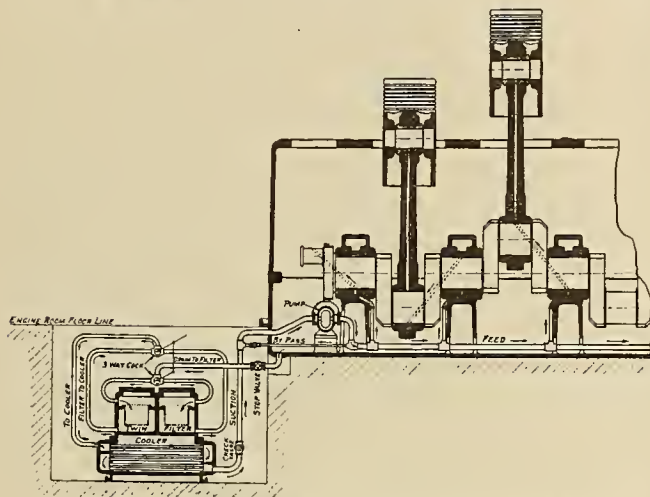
Lubricating System of Busch-Sulzer Bros. Engine.
